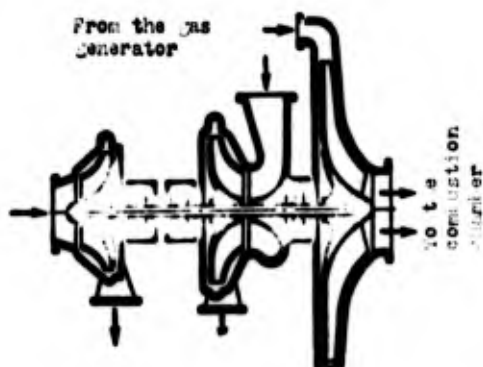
Diagram of a turbopump assembly with radial turbine.
